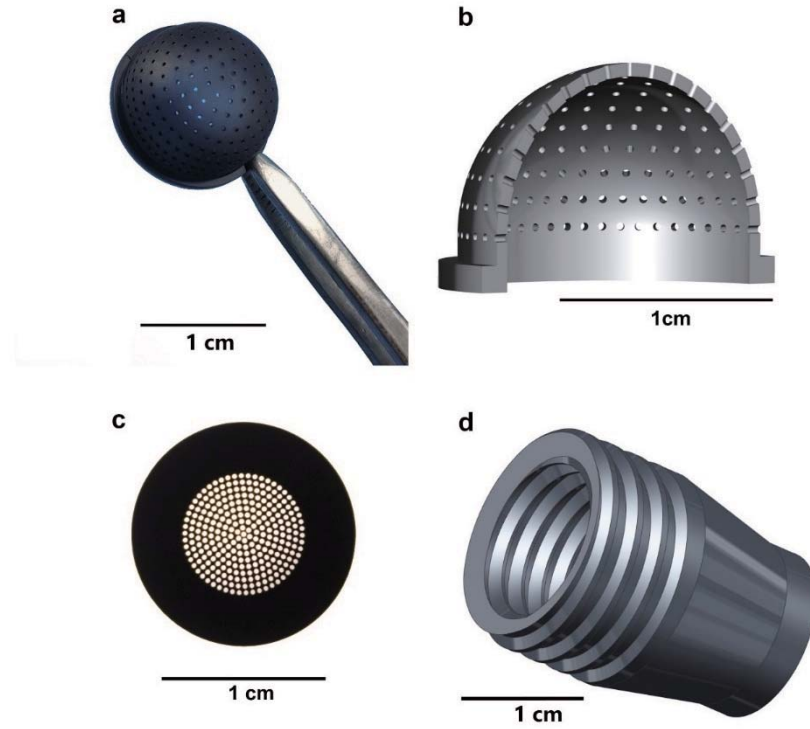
3D-printed components for the assembly of ACEcam. a, Photograph of the perforated dome, held by tweezers. b, Design of the perforated dome. c, Photograph of the perforated buncher. d, Design of the screwed hollow tube that will be used to hold the dome and the buncher.
